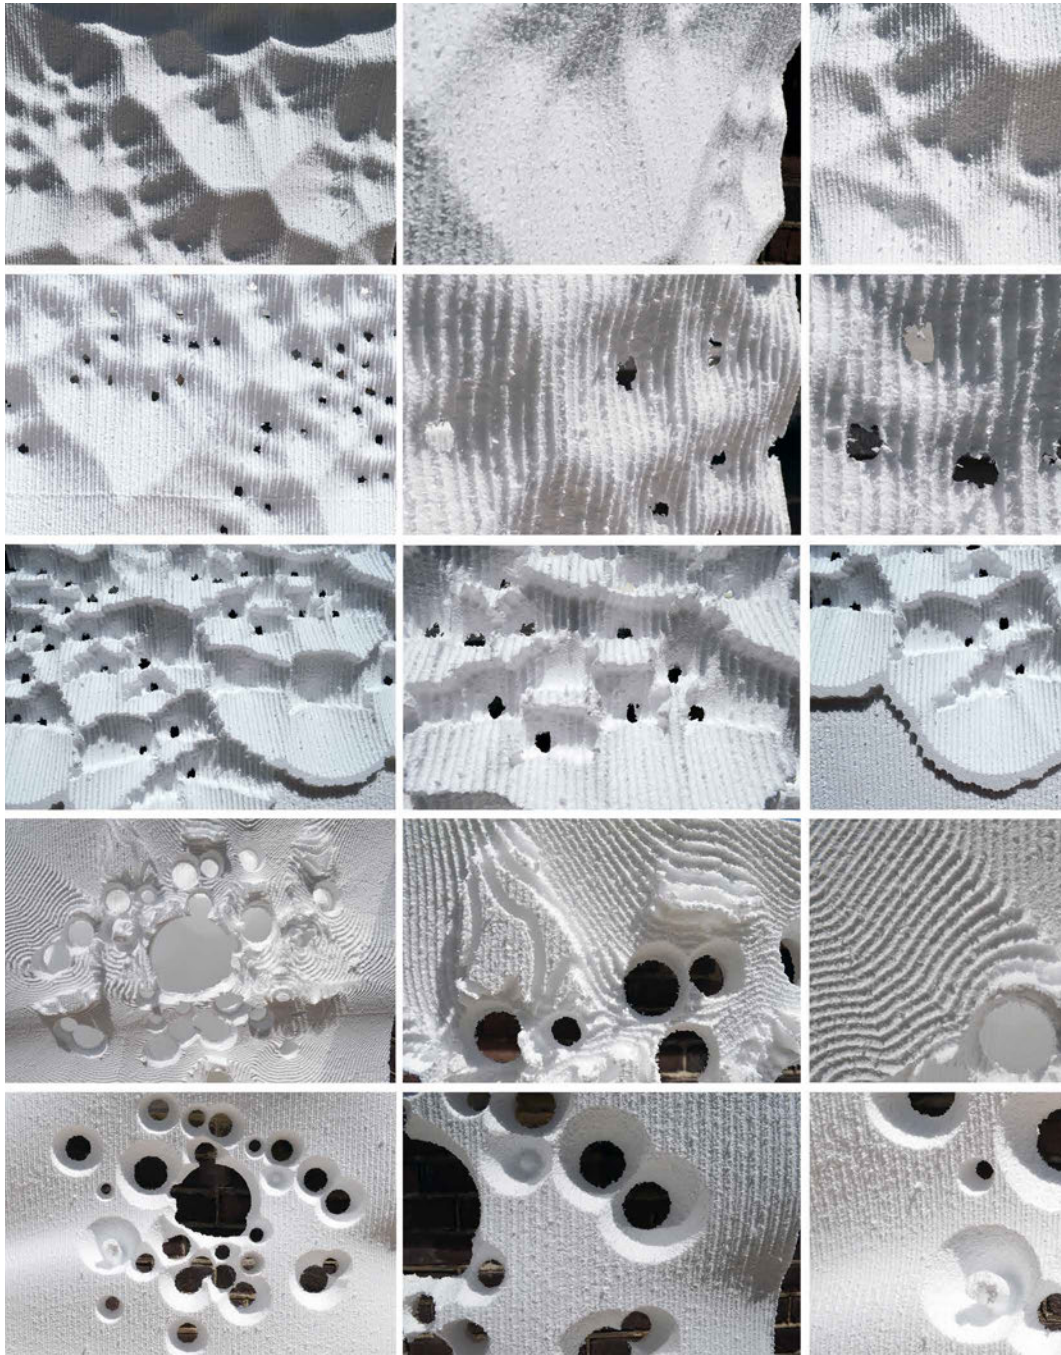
Example of how the topology of fabrication affects the geometric qualities: surface tectonics and porosity exploration using Robotic 3D Milling.
